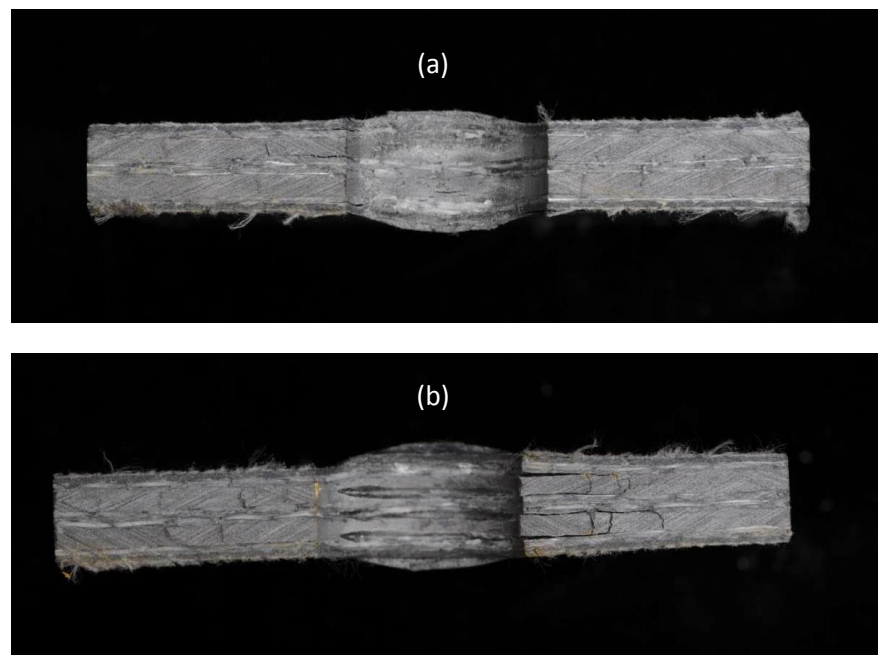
Failed Pin-bearing Specimen tested with (a) Plain Pin and (b) Threaded Pin
